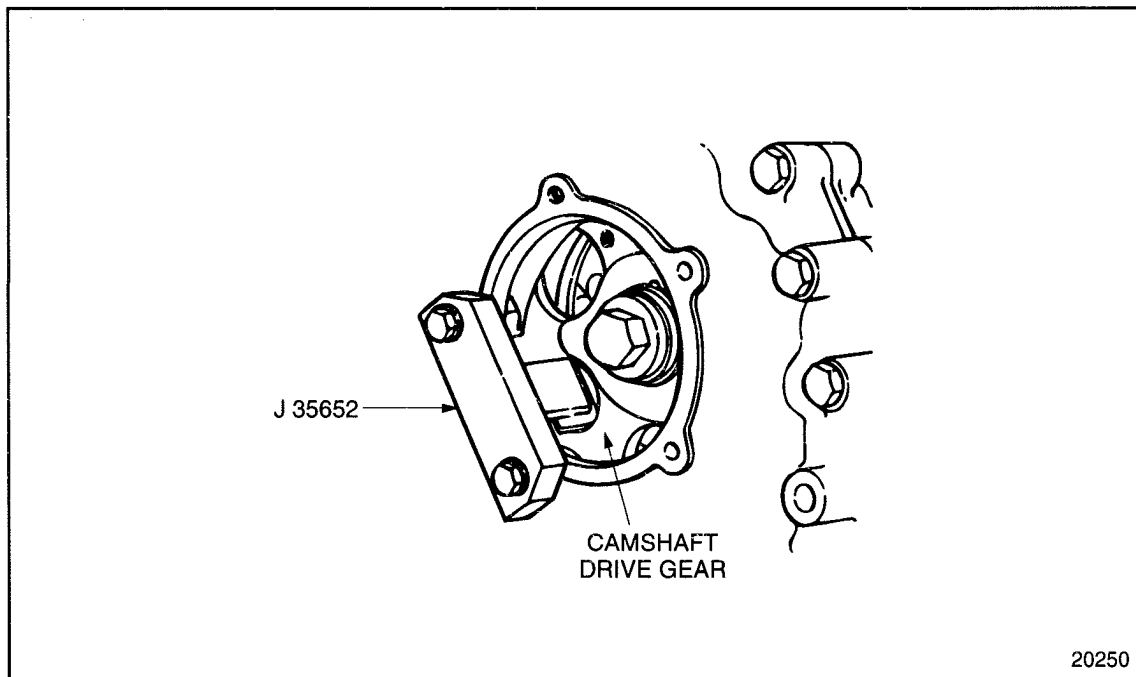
Camshaft Drive Gear Torque Holding Tool Installation
